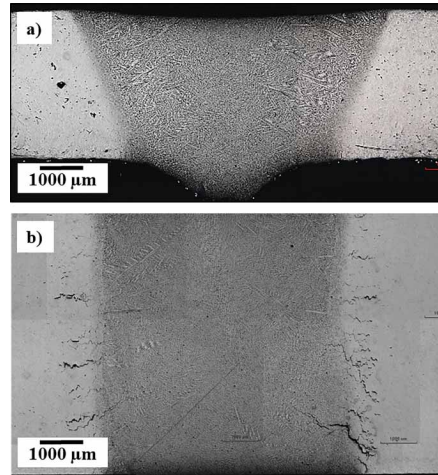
(a) Weld cross-section of SLM as-built and (b) weld top surface of SLM HIPed Alloy 718 tested at 4% augmented strain.
